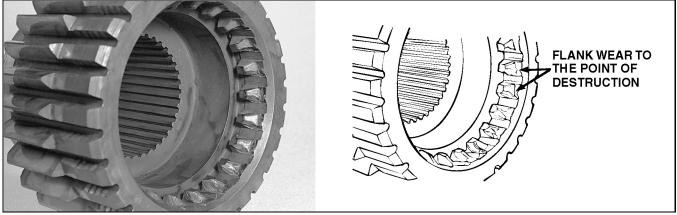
Compound Mainshaft Hub (Pinion Gear)
